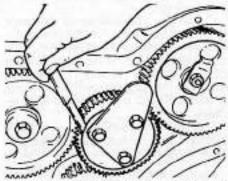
View showing proper position of special tab washer and use of a feeler gage to shock clearance which should be between 0.050 and 0.1016 mm (0.002 and 0.004 inch). Adjust by removing or installing shims.
